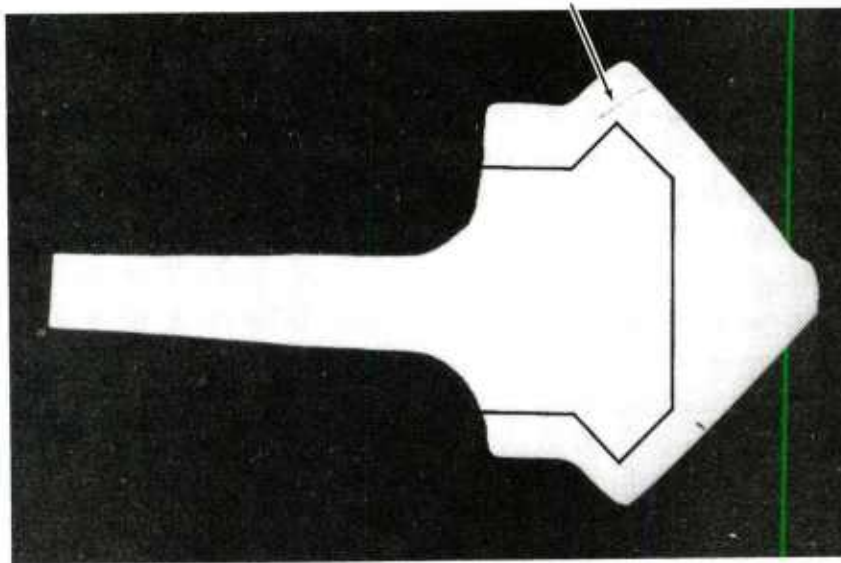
Macrosection of Finish Forged Blade Root Showing Forging Defects and Outline of Finished Machine Contour.
